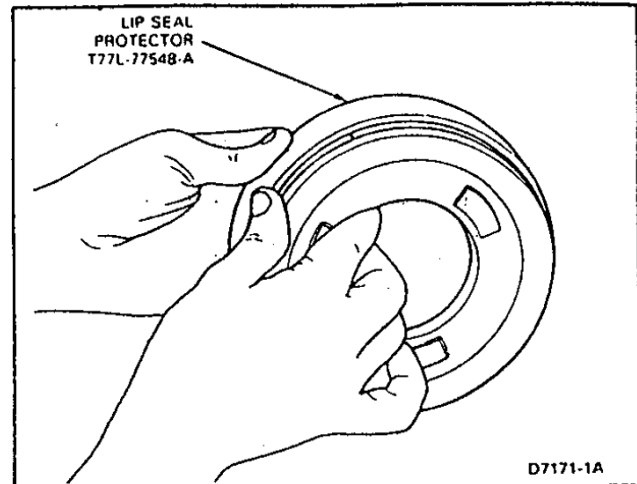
Installing Forward Clutch Piston and Lip Seal
